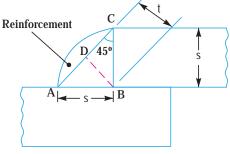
Enlarged view of a fillet weld.
